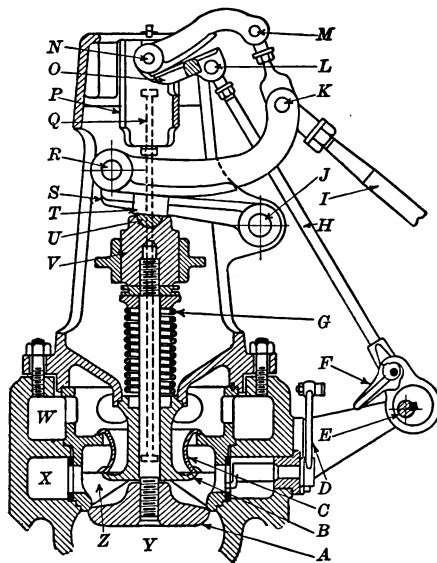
INTAKE VALVES AND VALVE GEAR,
